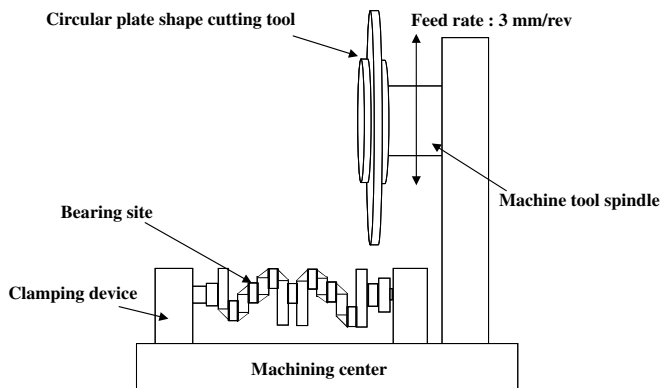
Configuration of the machining process for the bearing sites of a crankshaft by the circular plate cutting tool.
